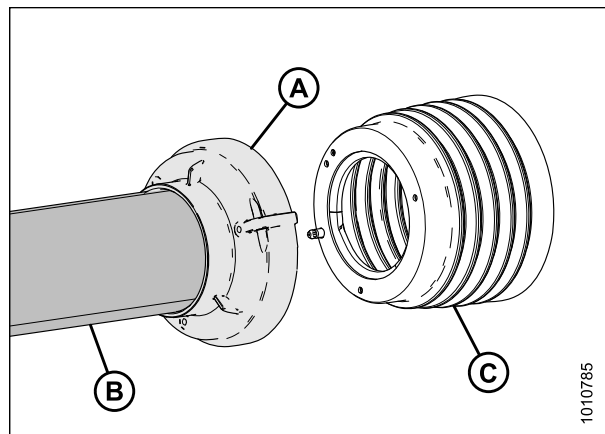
Base Cone and Shield Tube Removed from Outer Cone
